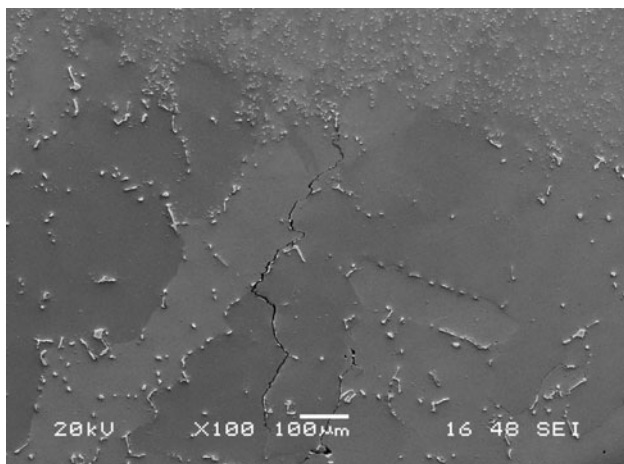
Intergranular cracks in the heat-affected zone of as-cast Inconel 738 gas tungsten arc welded with Inconel 625 filler. The filler alloy is visible at top portion of the image
